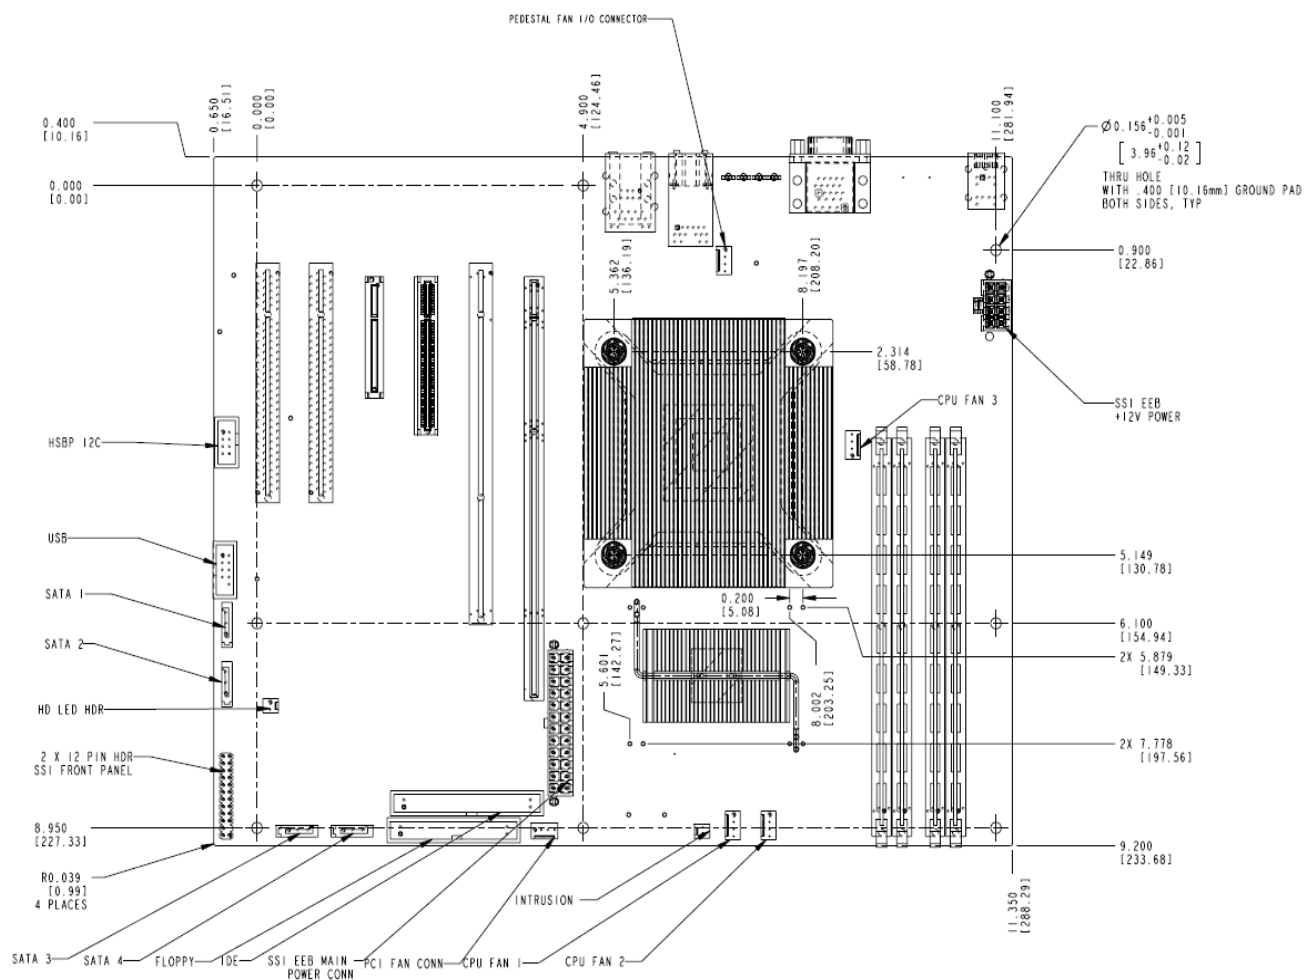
Intel® Server Board S3000AHLX – Hole and Component Positions (1 of 2)
